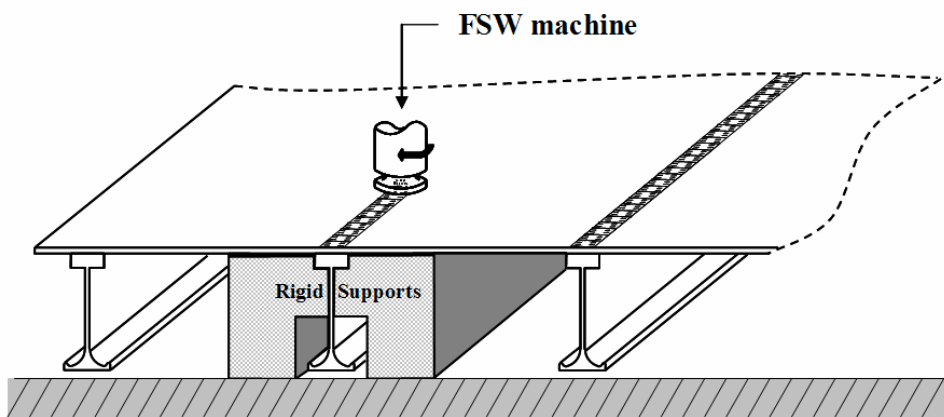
(e) Schematic of FSW for lap-joining between the plate sheet and the extrusion (Method D)
